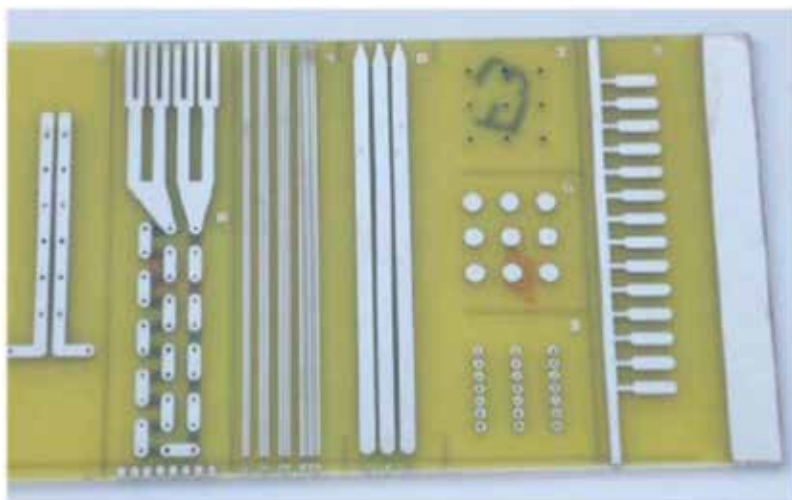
A PCB presenting copper tracks immersion plated with Ag from DESs [79].
